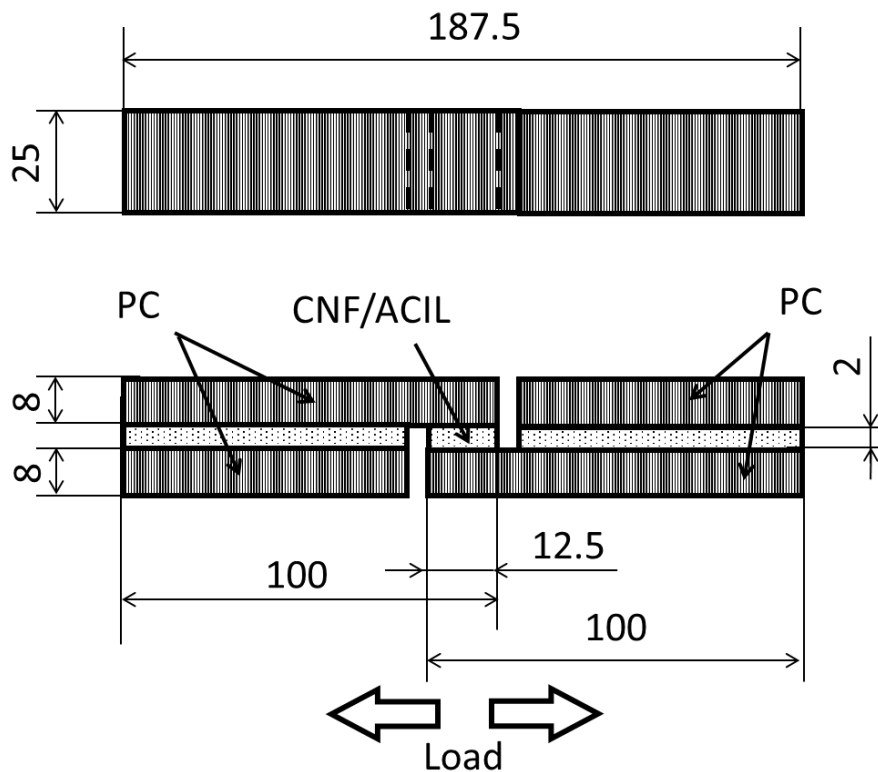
Shape and dimensions of specimens with PC-CNF/ACIL adhesive interface for tensile shear tests.
